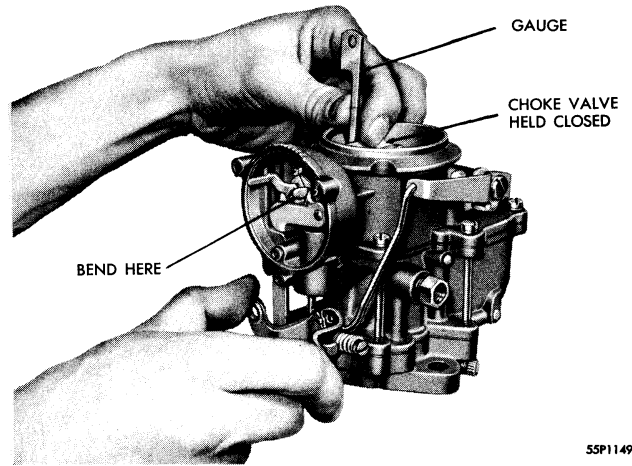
Fast Idle Adjustment—6 Cylinder Engine
